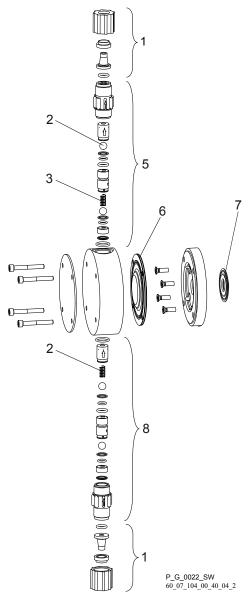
Liquid end gamma/ L 0232 PP without bleed valve
